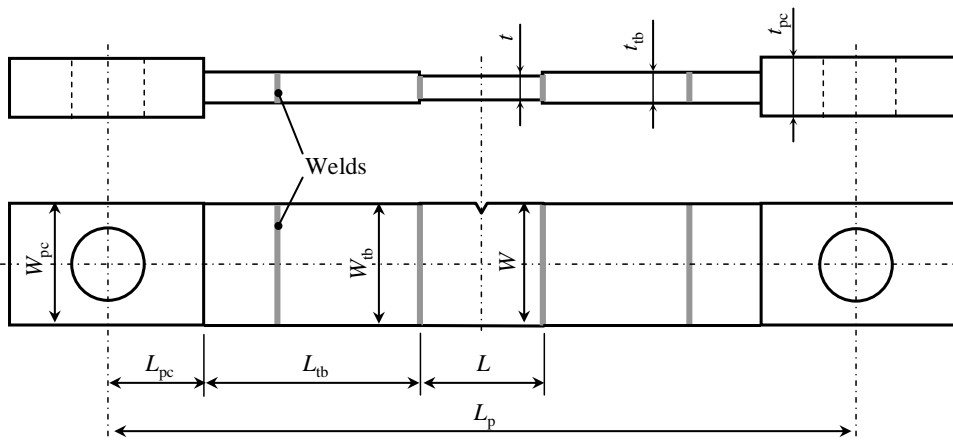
Definitions of dimensions of tab plates and pin chucks
